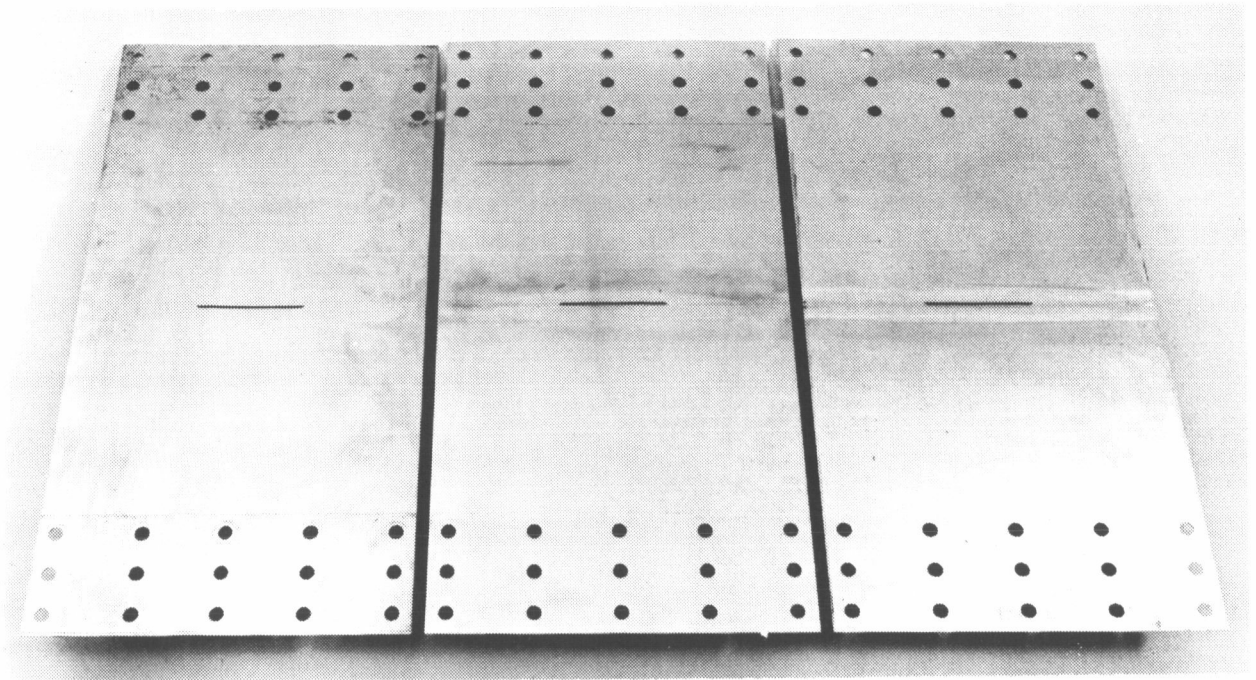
Center-Notched Crack Propagation Sheet Specimens Showing Notches in (Left to Right) Parent Material, Weld Zone, Fusion Line
